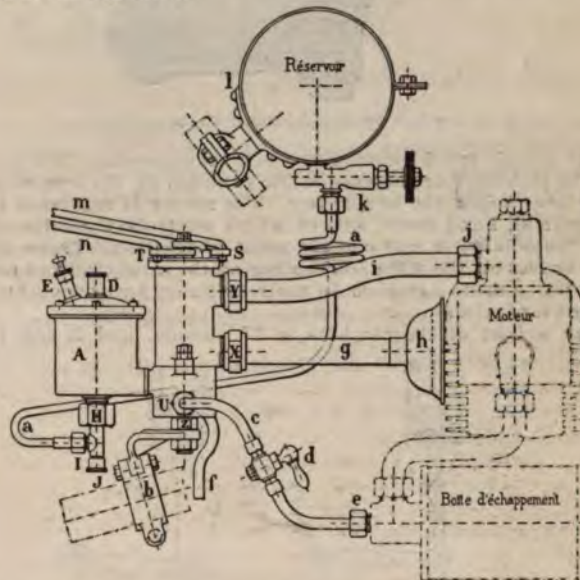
PIPE CONNECTIONS, LONGUEMARE CARBURETER TO TRICYCLE MOTOR.
